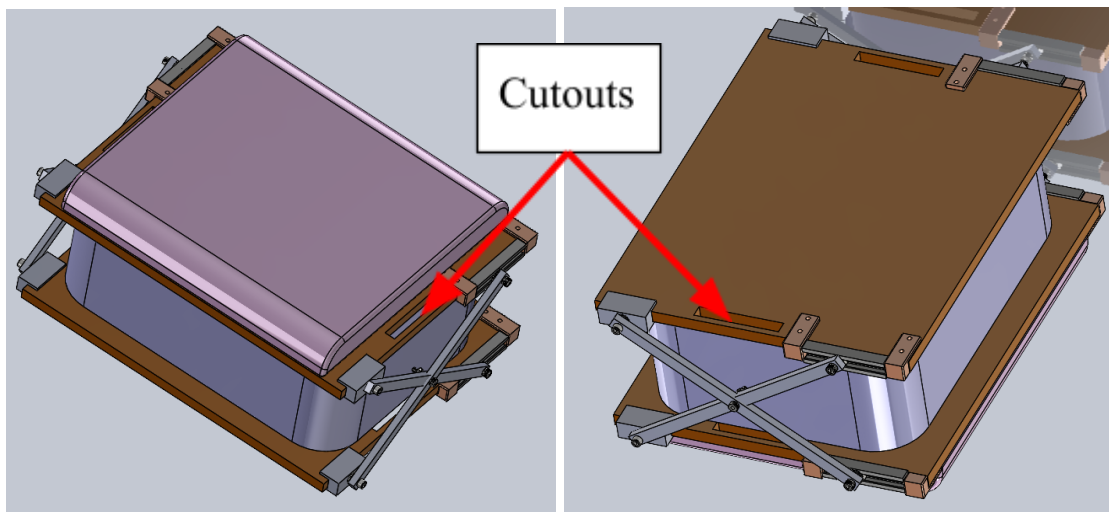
The cutouts in the top and bottom plate provide a method of securing the wheelchair sling to the top plate and the bottom plate to the wheelchair.
